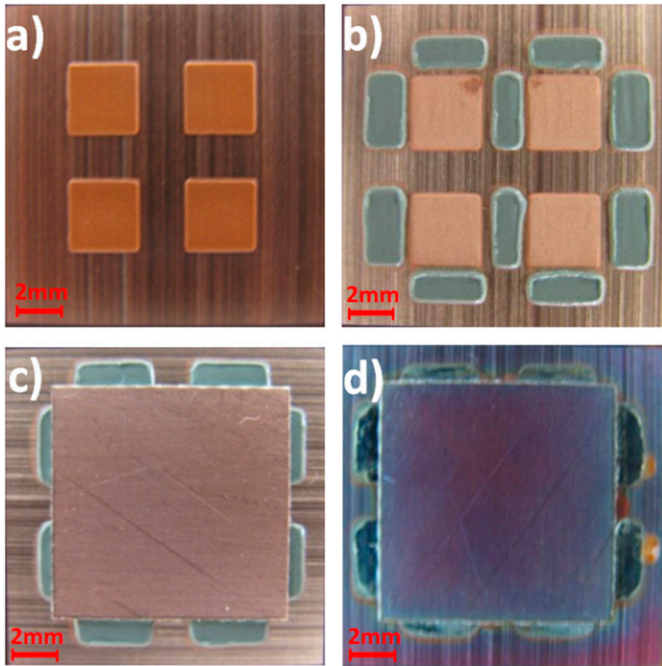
Production of intermetallic connections: (a) printing of copper paste, (b) printing of solder paste, (c) placing the chip, and (d) after soldering.
